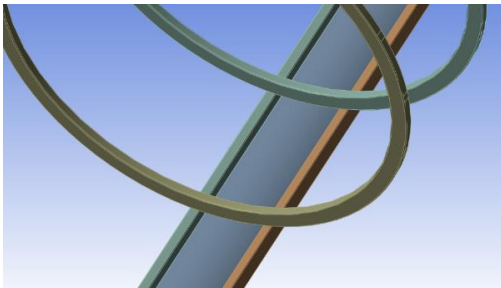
Isometric view of two stringer, two rings and a plate within the assembly
